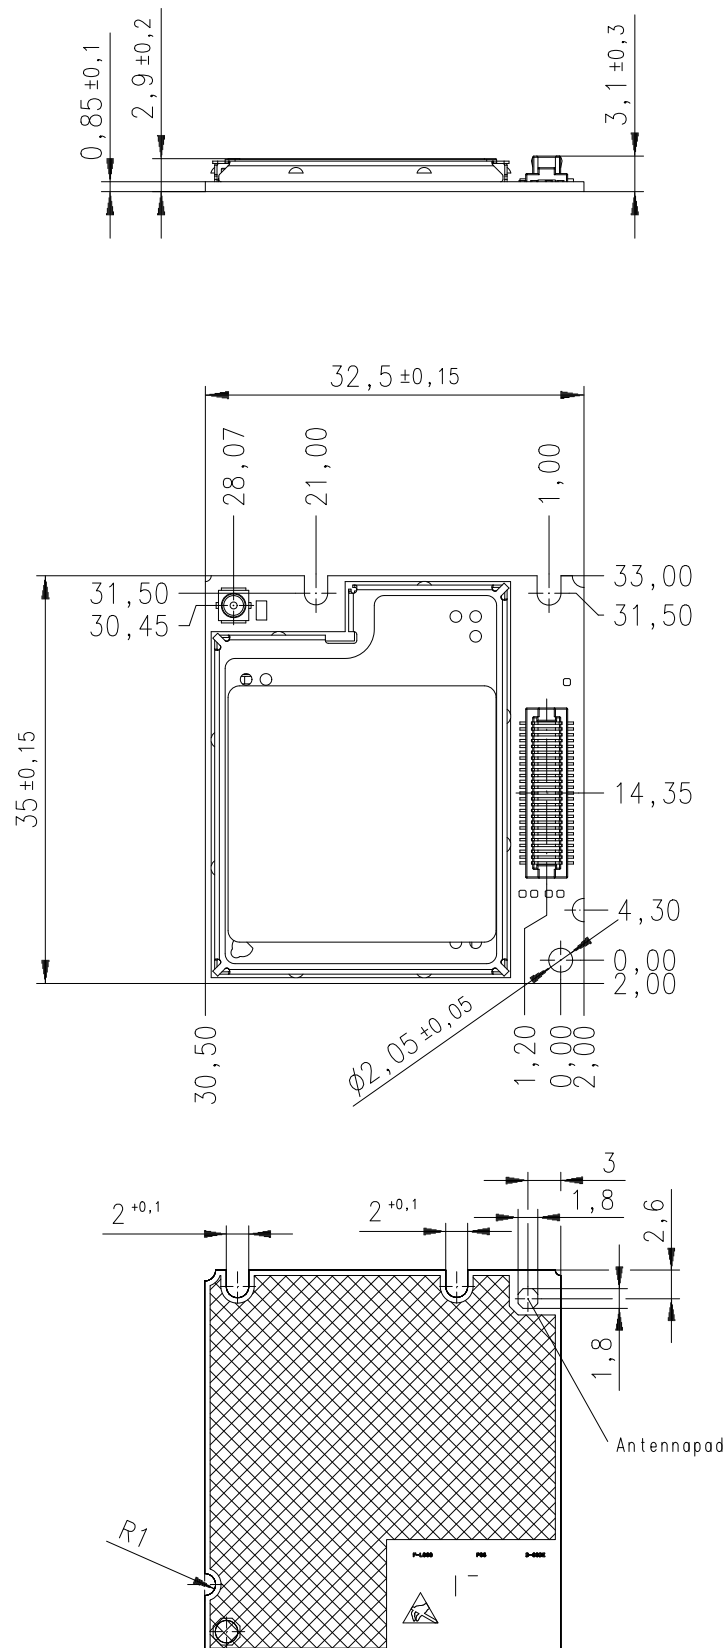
Mechanical dimensions of MC52iR3 (all dimensions in millimeters)
